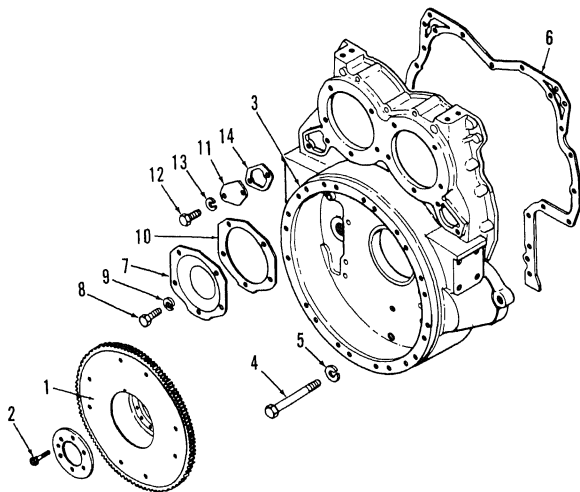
FLYWHEEL AND FLYWHEEL HOUSING
